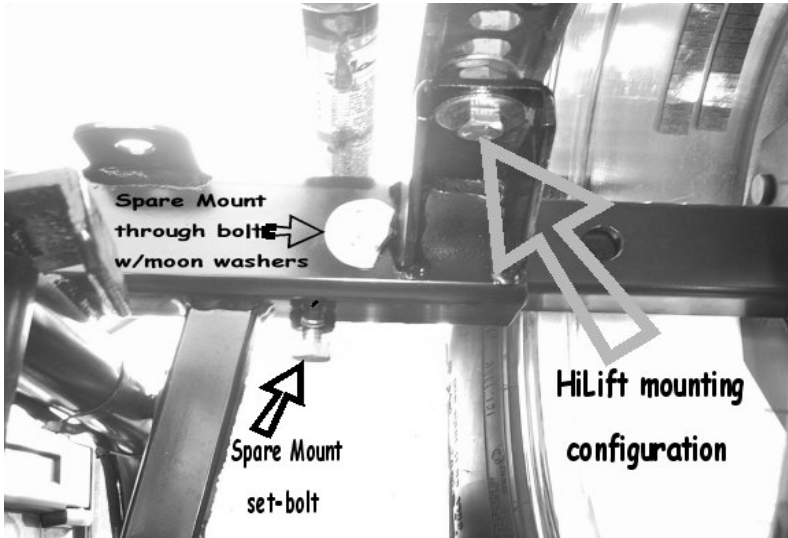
Spare mount - Spare mount set-bolt - Hi-lift jack mounting.
